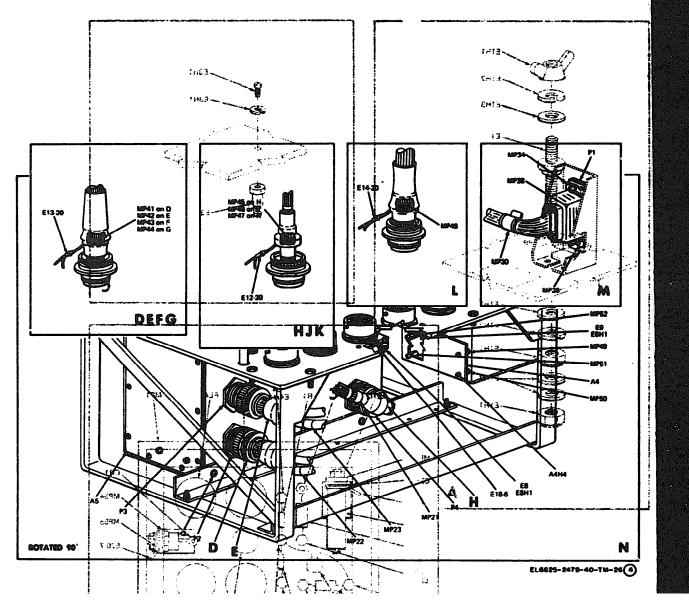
Panel assembly 1A3, parts location (parts 4 of 5).
